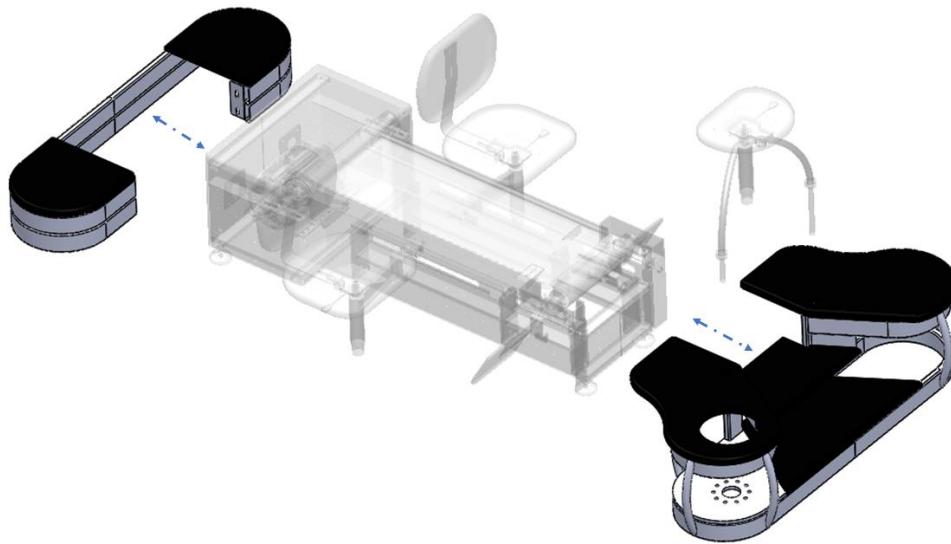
Front and Rear Stabilizing Decks Exploded View Showing Modularity
